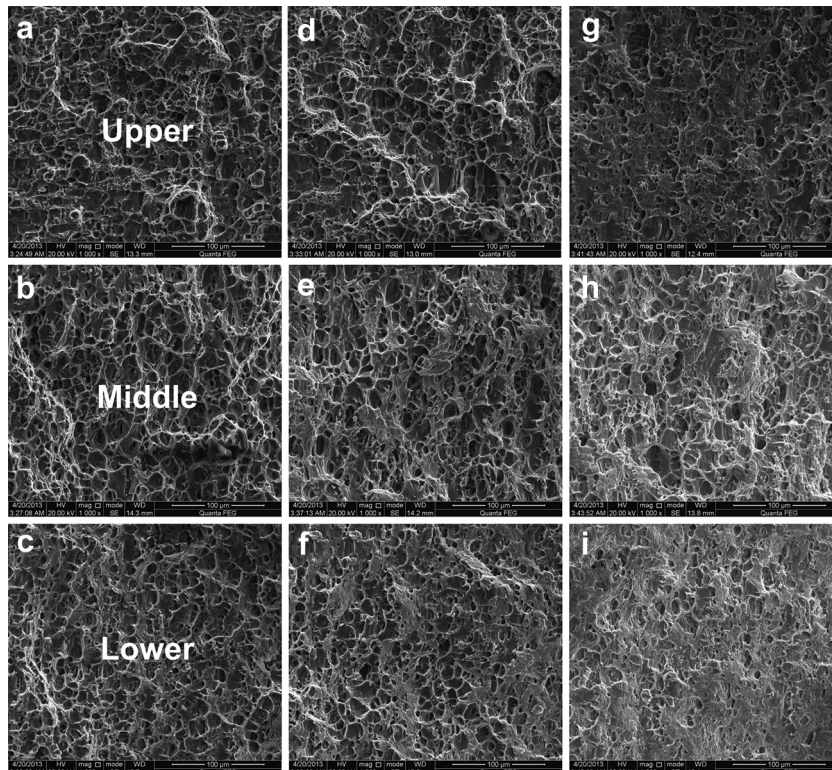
Effect of welding speeds on fracture morphology: (a–c) 50 mm/min, (d–f) 100 mm/min, (g–i) 200 mm/min.
